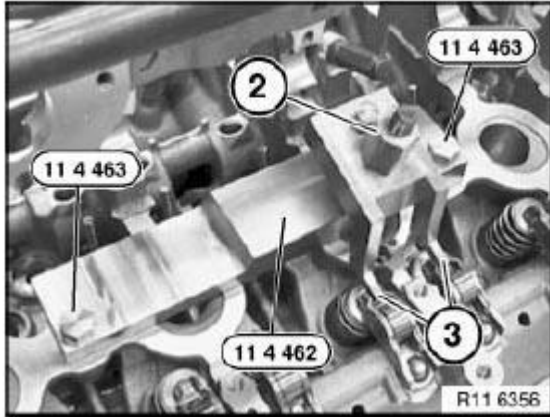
Cam Followers, Spindle Nut And Special Tools
